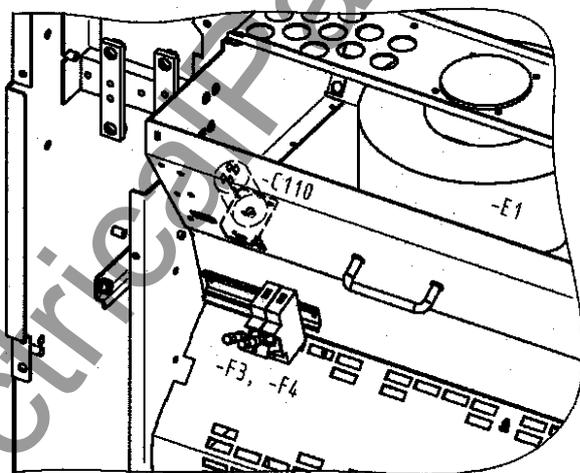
Fan assembly -E1, fan transformer primary fuse, starting capacitor -C110
